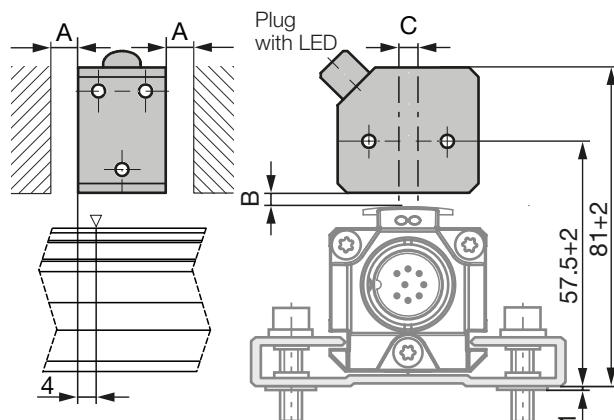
Dimensions and distances with BTL5-P-4500-1 electromagnet (24 V/100 mA)
